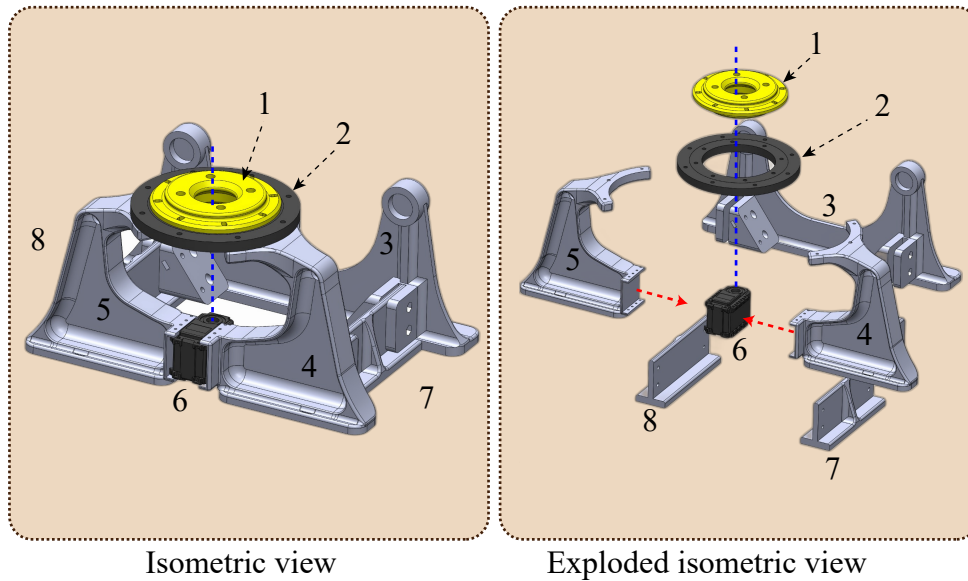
Exploded view of the structural base of the CASTOR robot and its assembly. Where the parts are listed and how the motor is an active part of the structural group. This base is composed of 6 pieces manufactured in 3D printing, which are (1,3,4,5,7,8); a motor piece 6 and a bearing, piece 2 that generates support to the neck joint
